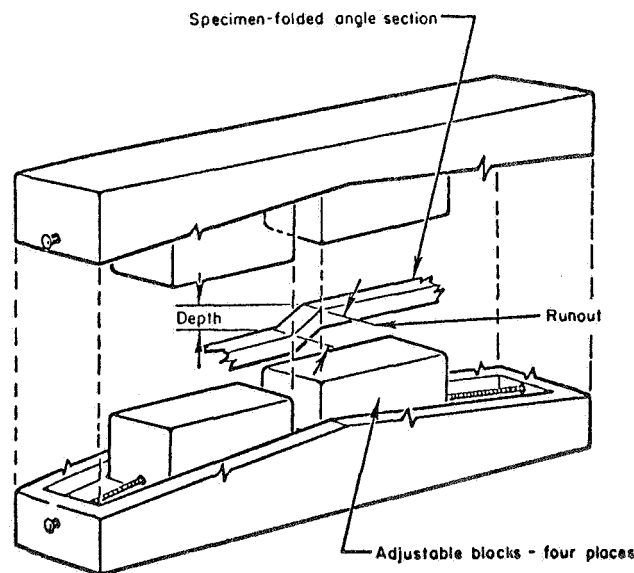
UNIVERSAL JOGGLE DIE (REF. 44)
